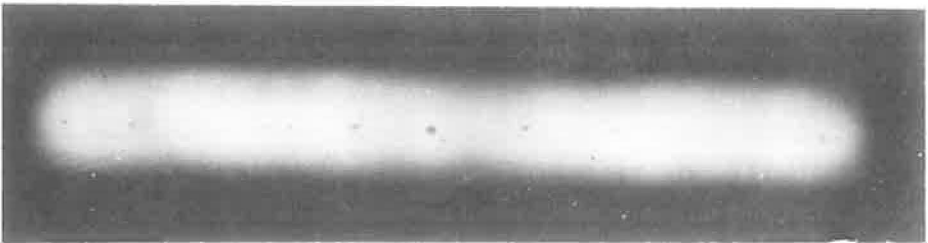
Radiographs of welds in $\frac{1}{2}$ -in. 2219-T87 plate.
